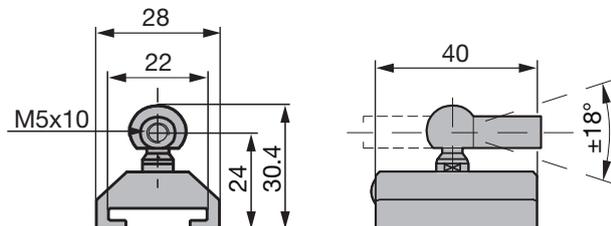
Installation dimensions of BTL5-F-2814-1S magnet
